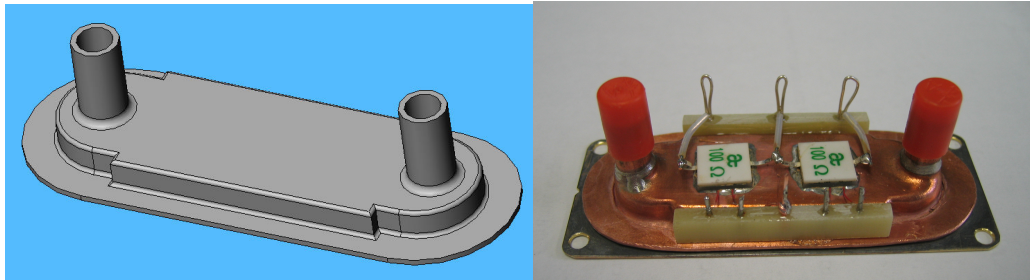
Diagram and Picture of Cold Plate Evaporator Module
